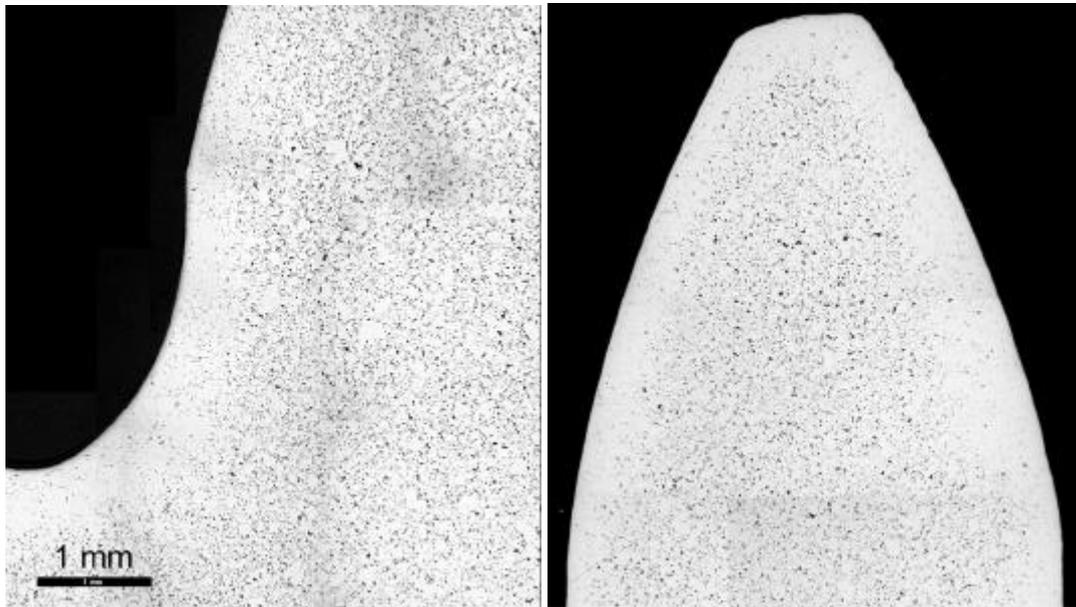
Cross section of a surface densified P/M gear tooth in the as-polished condition. *Left*: Tooth root section. *Right*: Flank and top of tooth. The scale marker is 1 mm.
